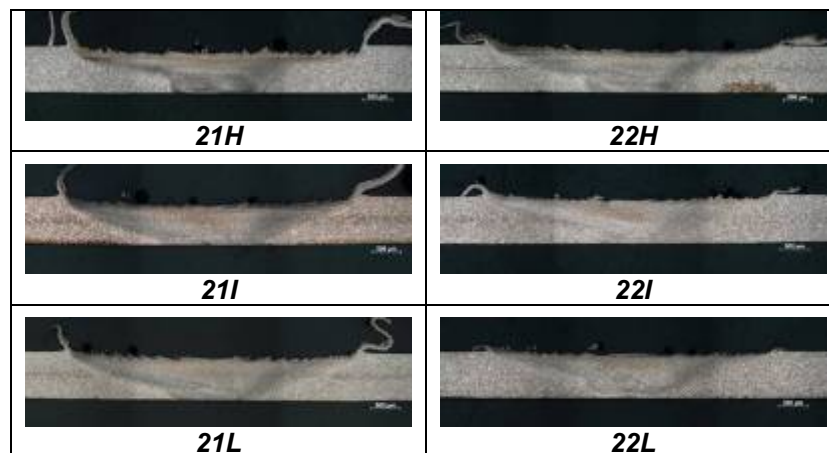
Etched transverse sections of the friction stir welds realised with "tool2".
